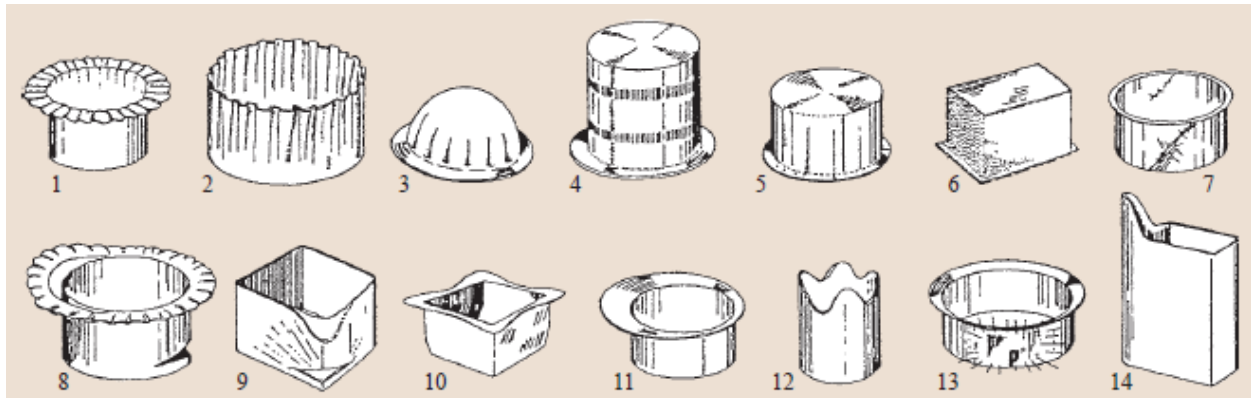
Various failure modes in deep-drawing: 1-flange wrinkling; 2-wall wrinkling; 3- part wrinkling; 4-ring prints; 5- traces; 6-orange skin; 7-Lüder's strips; 8-bottom fracture; 9- corner fracture; 10,12-folding; 13,14-corner folding. [2]
